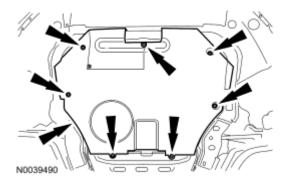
Locating Splash Shield Bolts Courtesy of FORD MOTOR CO.
